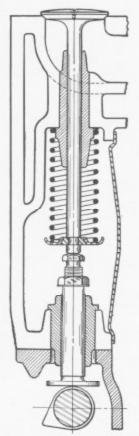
A Properly Refaced Valve Assembled in the Engine with the Valve Stem Fitting the Valve Guide and the Valve Face Fitting the Valve Seat Perfectly
